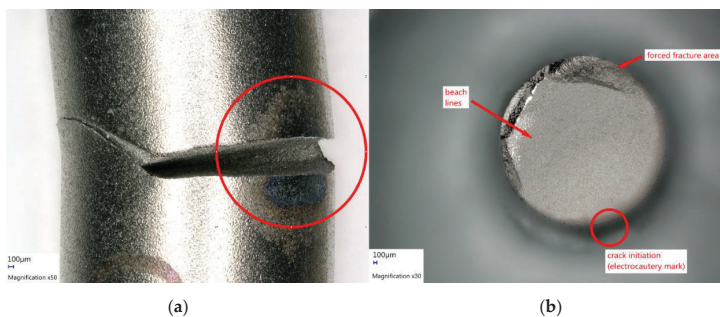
Microscopic analysis of fractured titanium rod after electrocautery (VHX-5000, Keyence, Osaka, Japan). (a) Post-fracture situation at the electrocautery mark. (b) Fracture surface with typical signs of fatigue fracture (beach lines and forced fracture area). The circle shows the location of crack initiation at the electrocautery mark.
